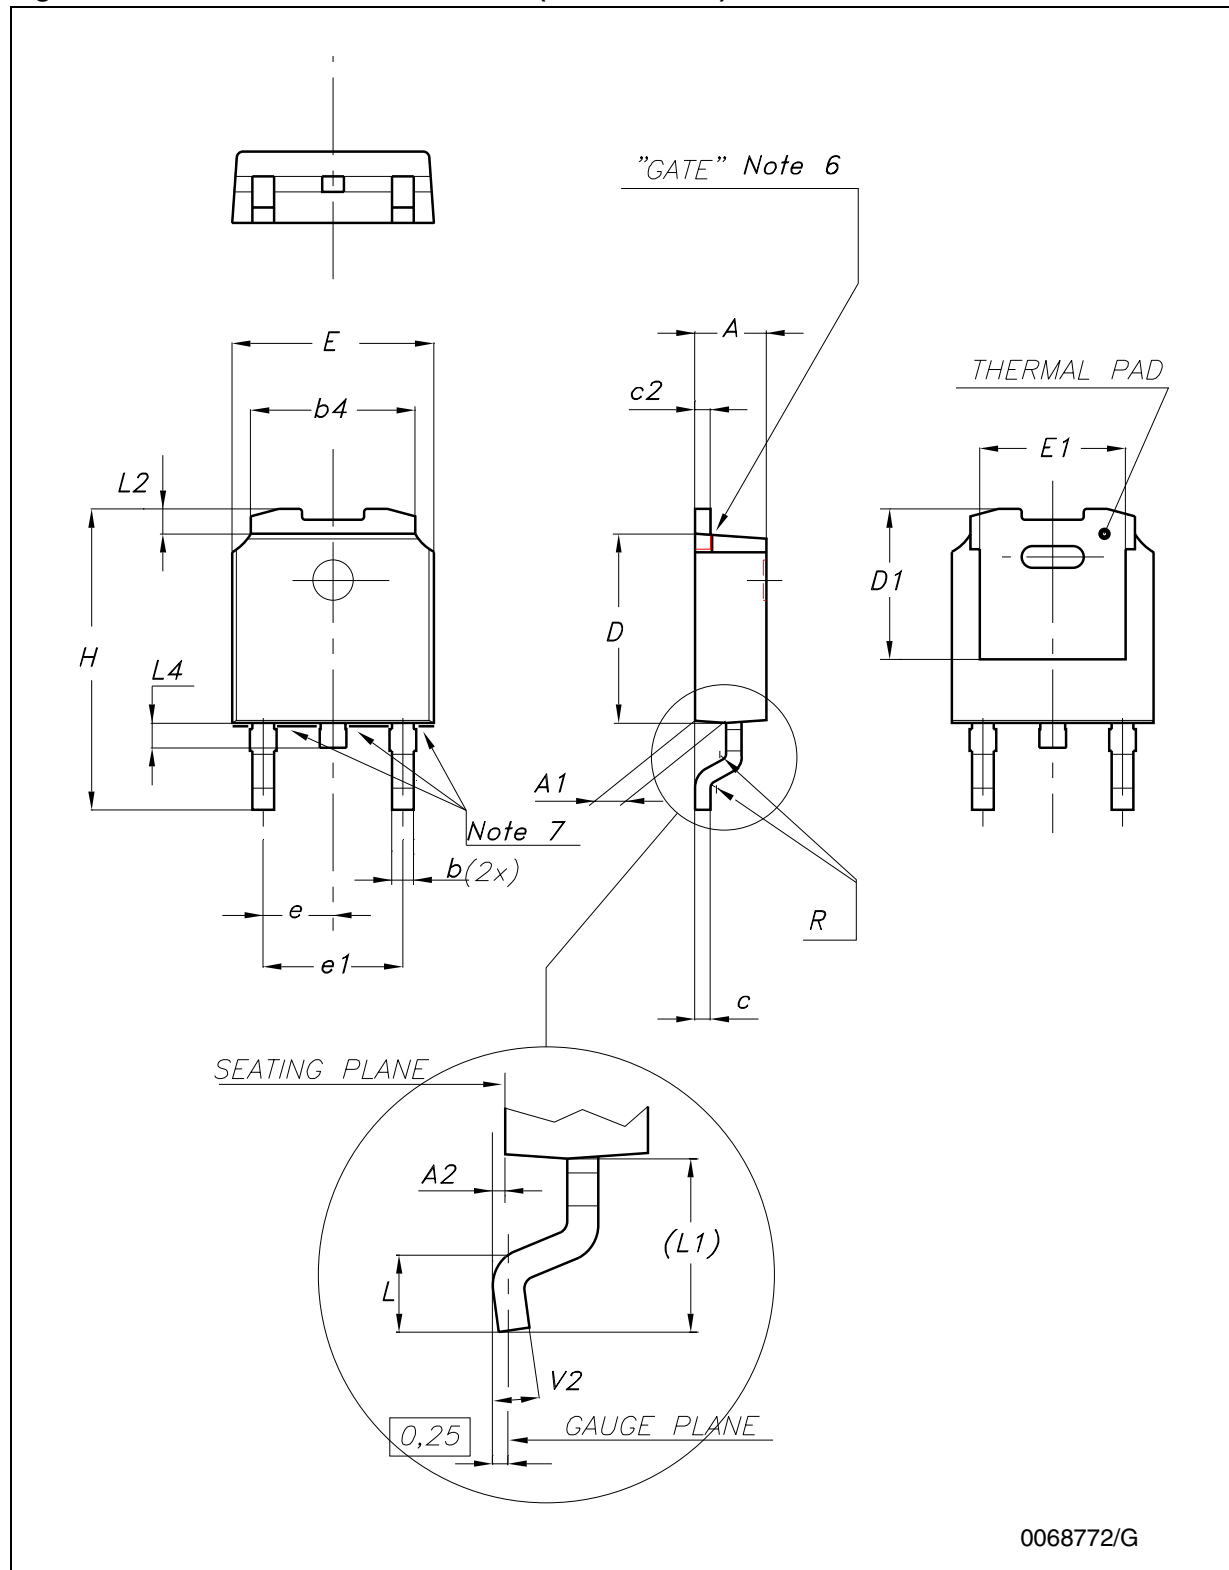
DRAWING DIMENSION DPAK (TYPE FUJITSU-SUBCON.)
